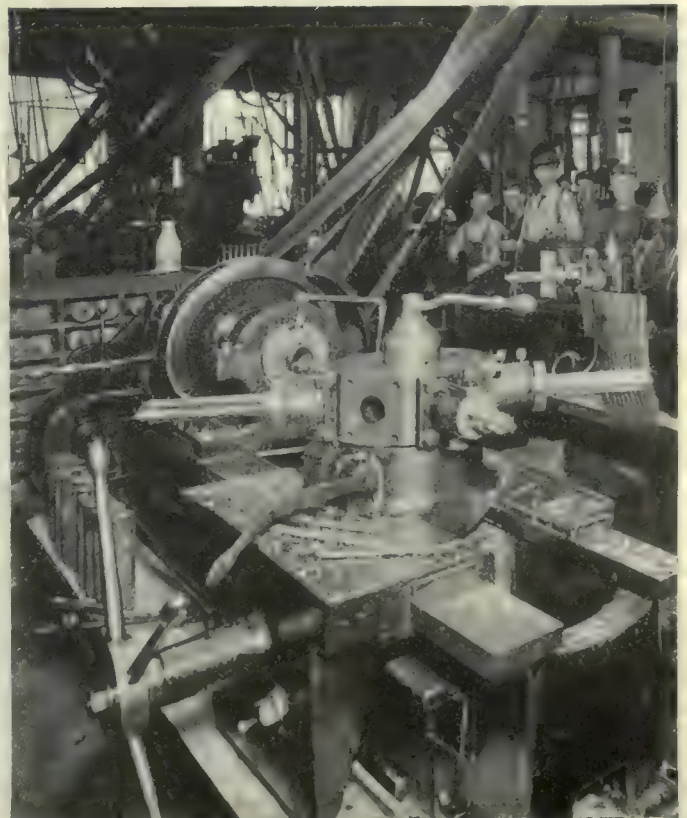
TWO-SPEED LATHE EQUIPPED FOR FINISH BORING THE INTERIOR AND COUNTERBORING NOSE BEFORE THREADING.
